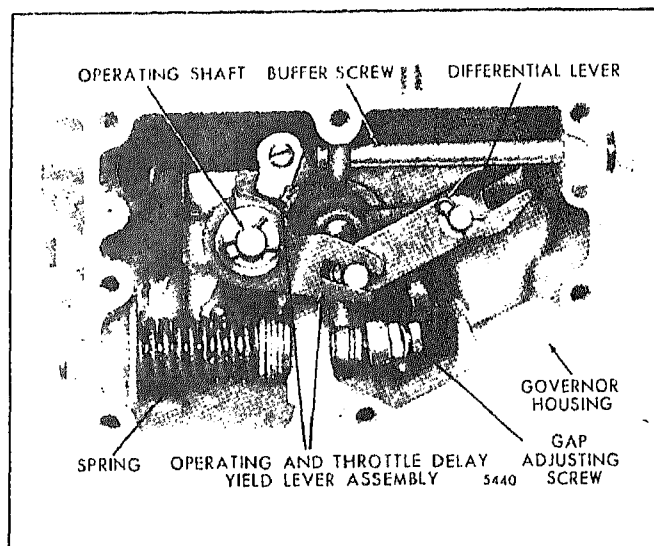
Throttle Delay Yield Lever (6V Engine)
